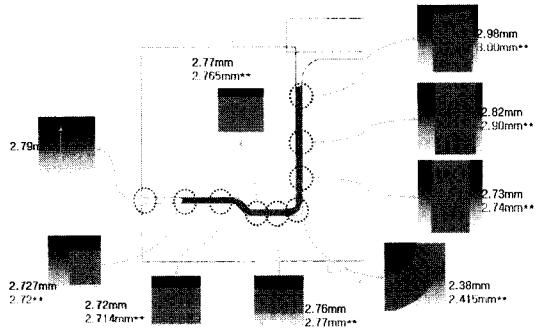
Comparison of dimension between drawing and reverse drawing processes in various forming parts (thickness in upper part:results of drawing process, :results of reverse drawing process)
